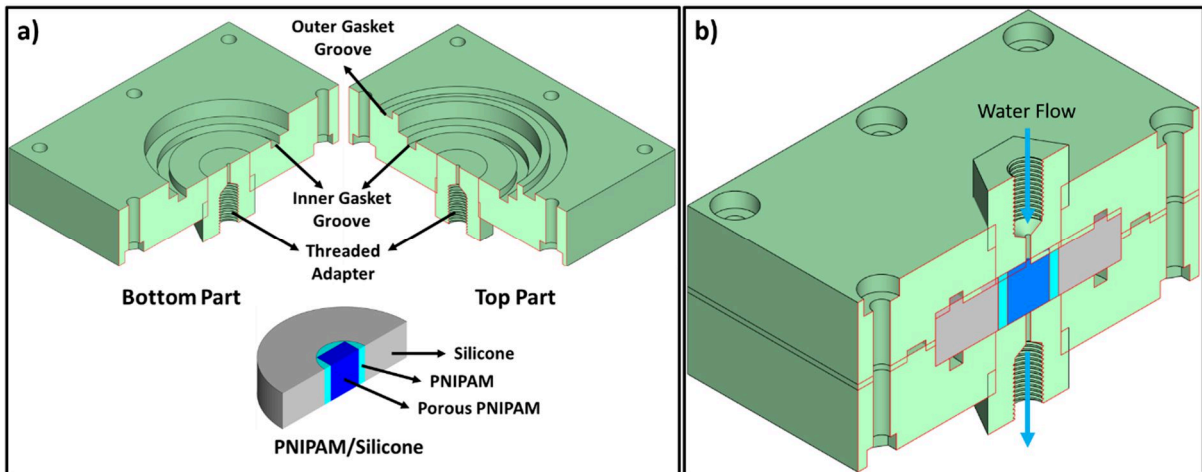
Schematic of the a) gel container and the disc shaped gel sample, b) cross-section of the assembled gel container system with sample inside.
